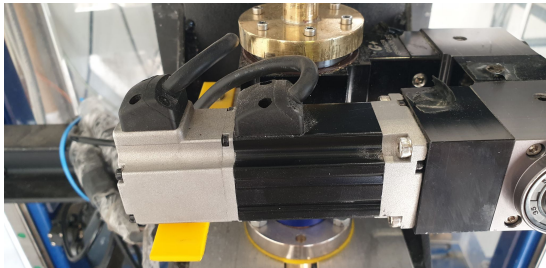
Hollow shaft gearbox with a rotary table [51].
